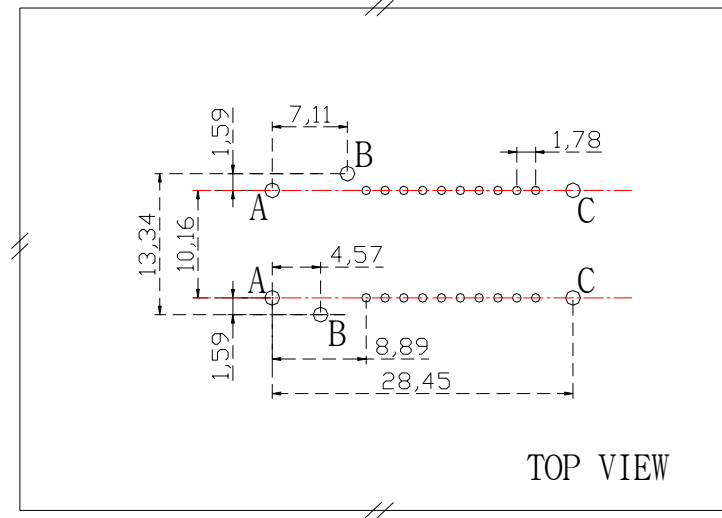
SFF Transceiver Package Dimensions [unit: mm]
